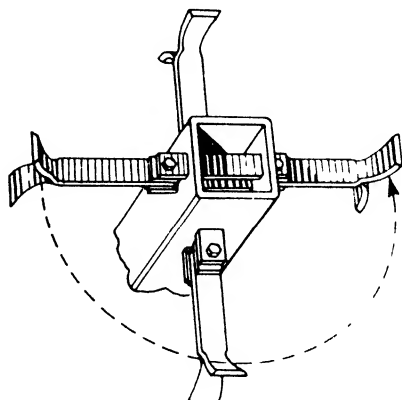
V-shaped flail cutters used on flail-type stalk shredder.
